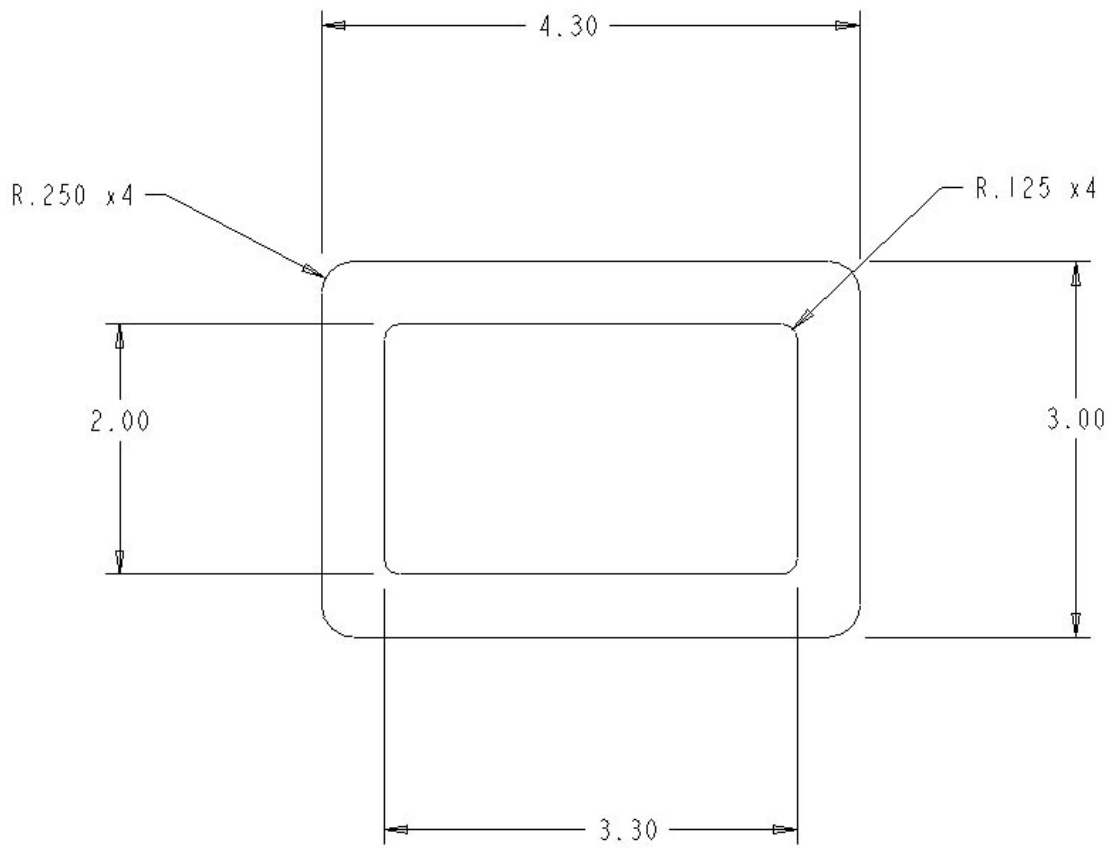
Dimensioned Drawing of the lid for the NEMA Type 1 Enclosure
